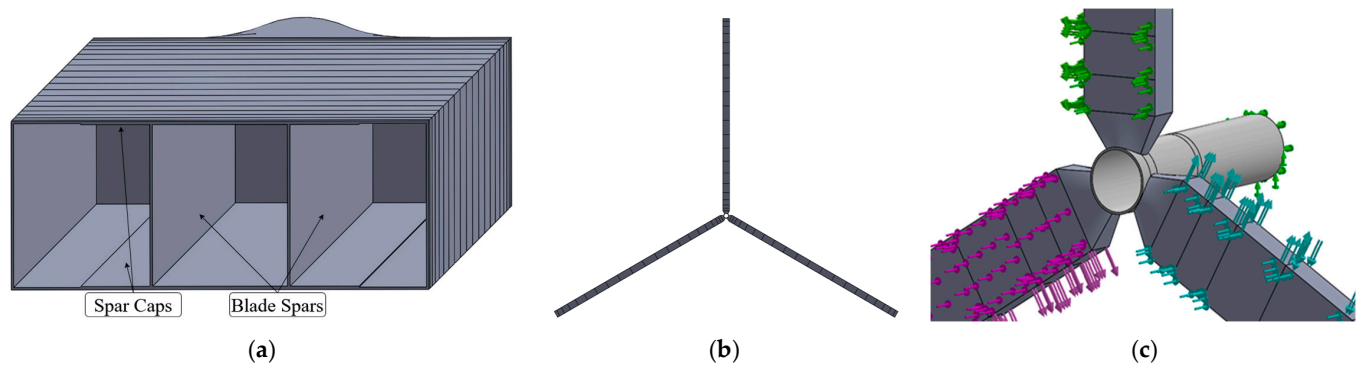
(a) Blade end view, (b) assembly front view and (c) assembly with applied constraints and loads.
